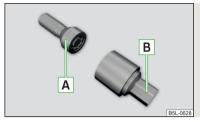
Principle sketch: Anti-theft wheel bolt with adapter
